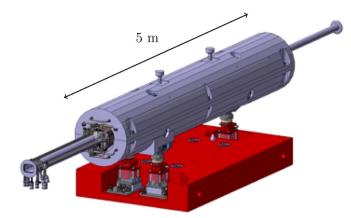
Isometric view of the TIDVG5 on its three support jack assemblies installed in a cast iron base.
